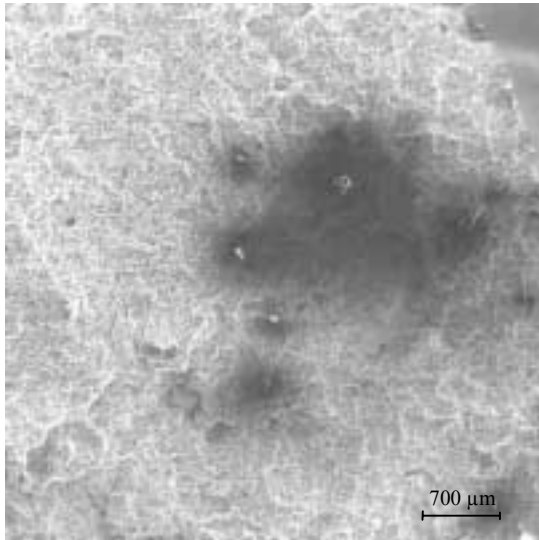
Non-metallic inclusions on the fracture surface of the AZ91 samples.
